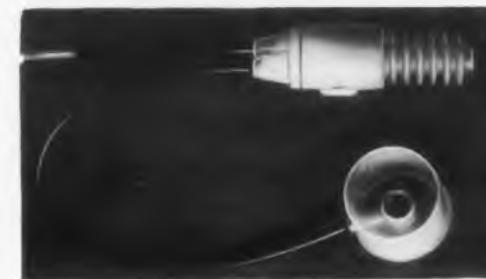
Unit Molded Alden High Voltage Cable Assembly Combines Suppressor Disconnect and Regulator Tube Cap Connector
